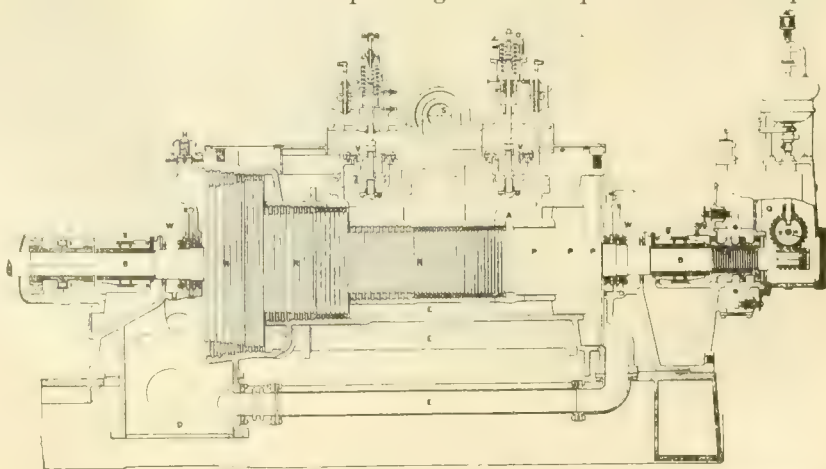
SECTION OF A 1000 KW, 1500 OR 1800 R. P. M. SINGLE-CYLINDER STEAM TURBINE OF THE STRAIGHT PARSONS TYPE
